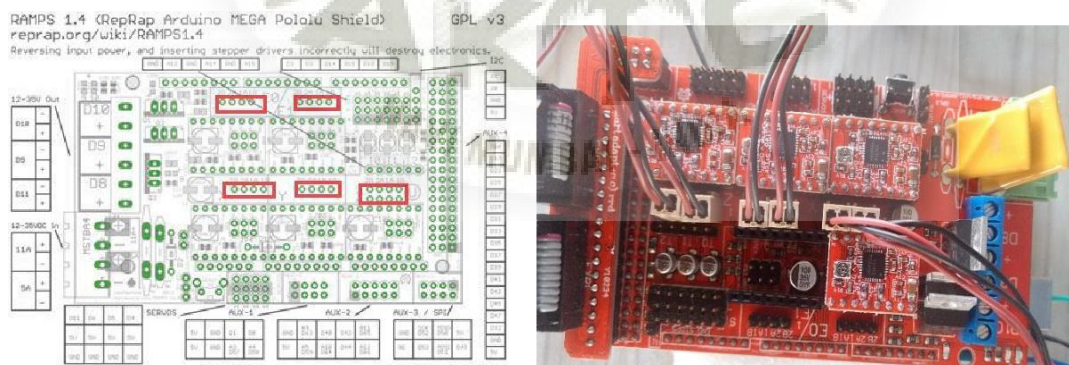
Top left: extruder 1. Top right: extruder 2. Bottom left: X-motor. Bottom middle: Y-motor. Bottom right: Z-motors.
